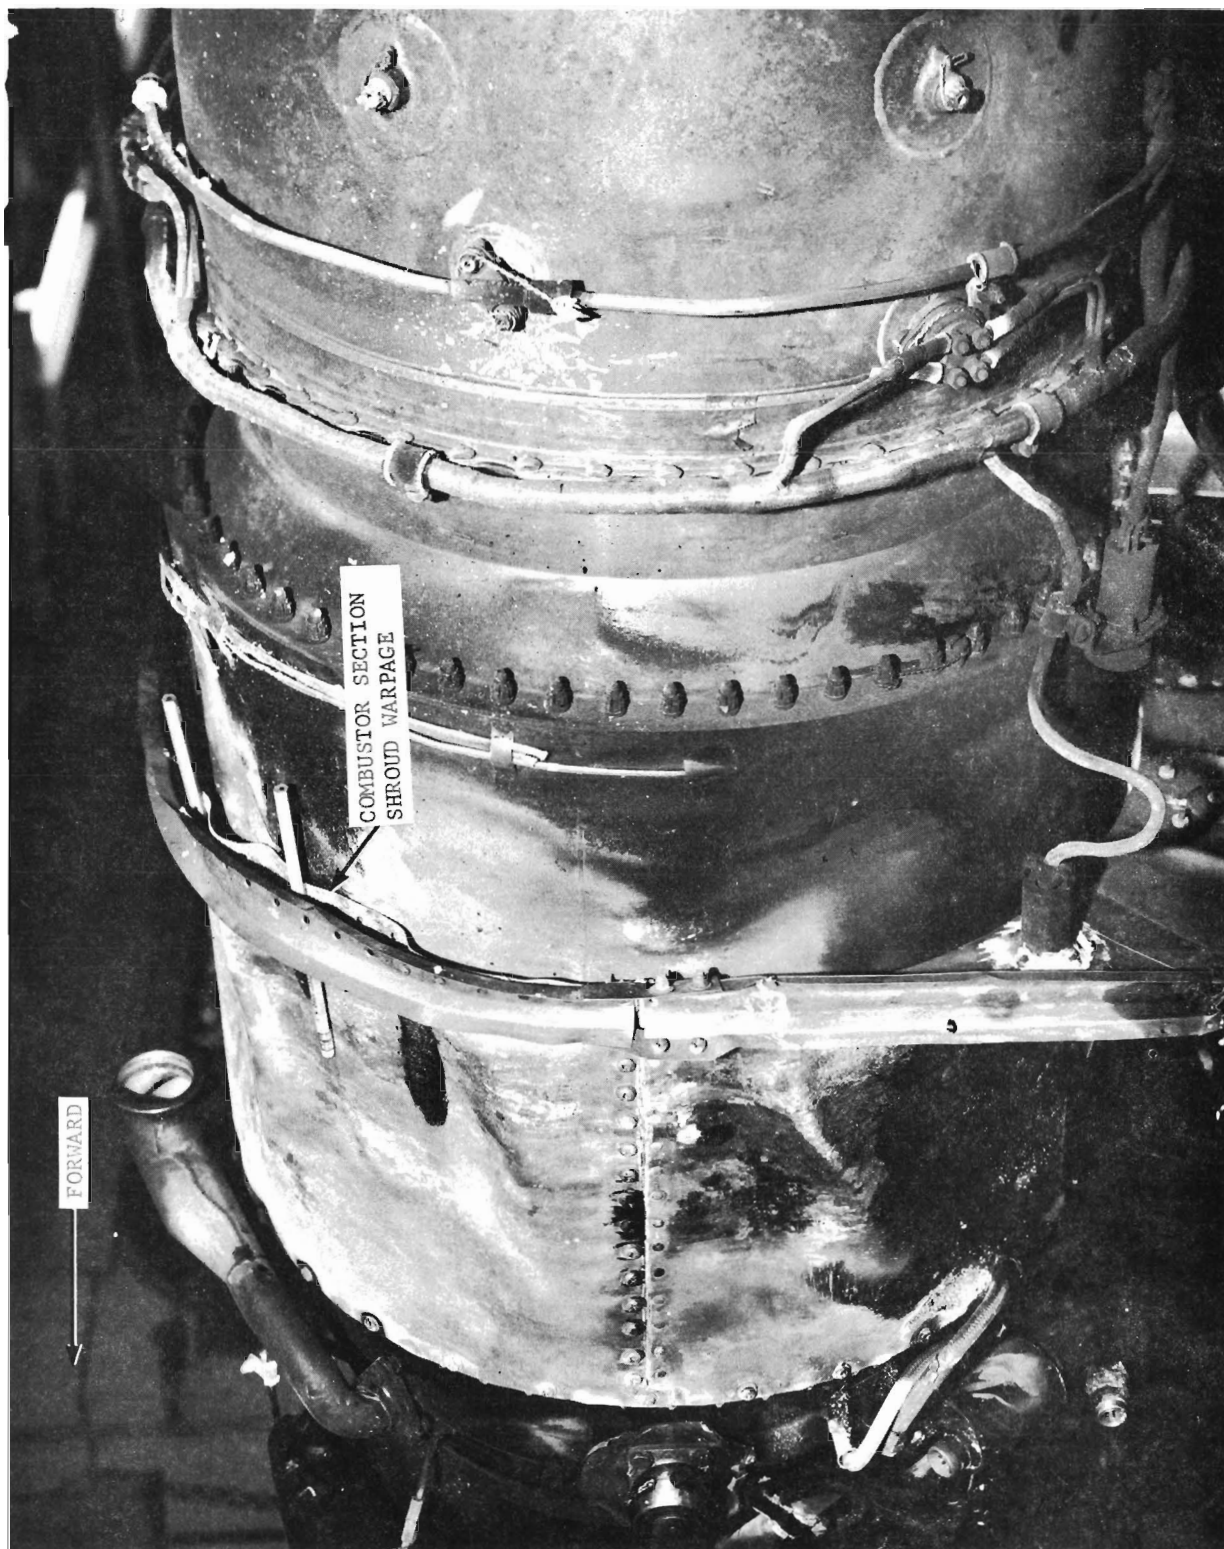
DAMAGE TO STAINLESS STEEL ENGINE COMBUSTOR SHROUD AND ATTACHED "U" FRAME
